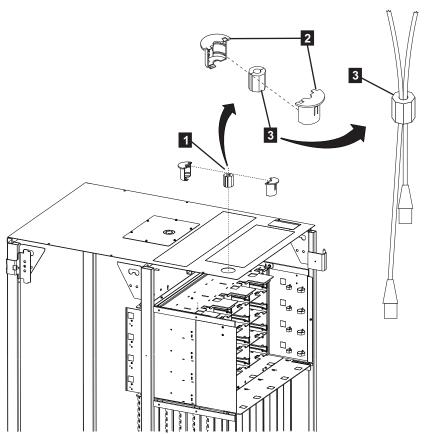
Top of frame power using the ferrite/cable restraint assembly
